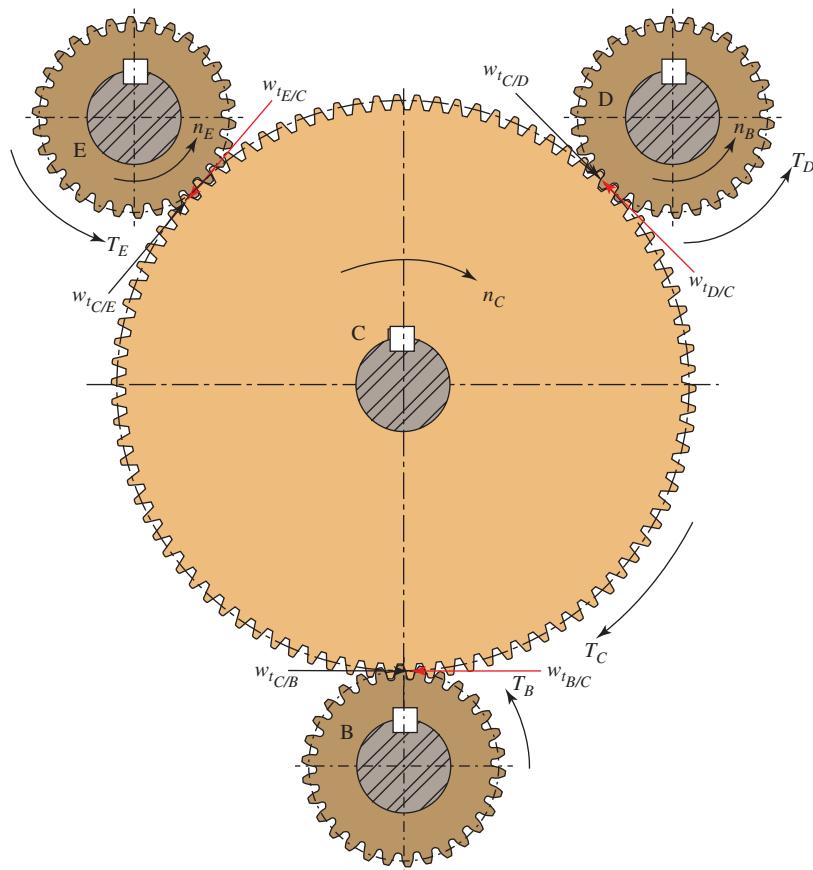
Tangential gear forces on gears B, C, D, and E
